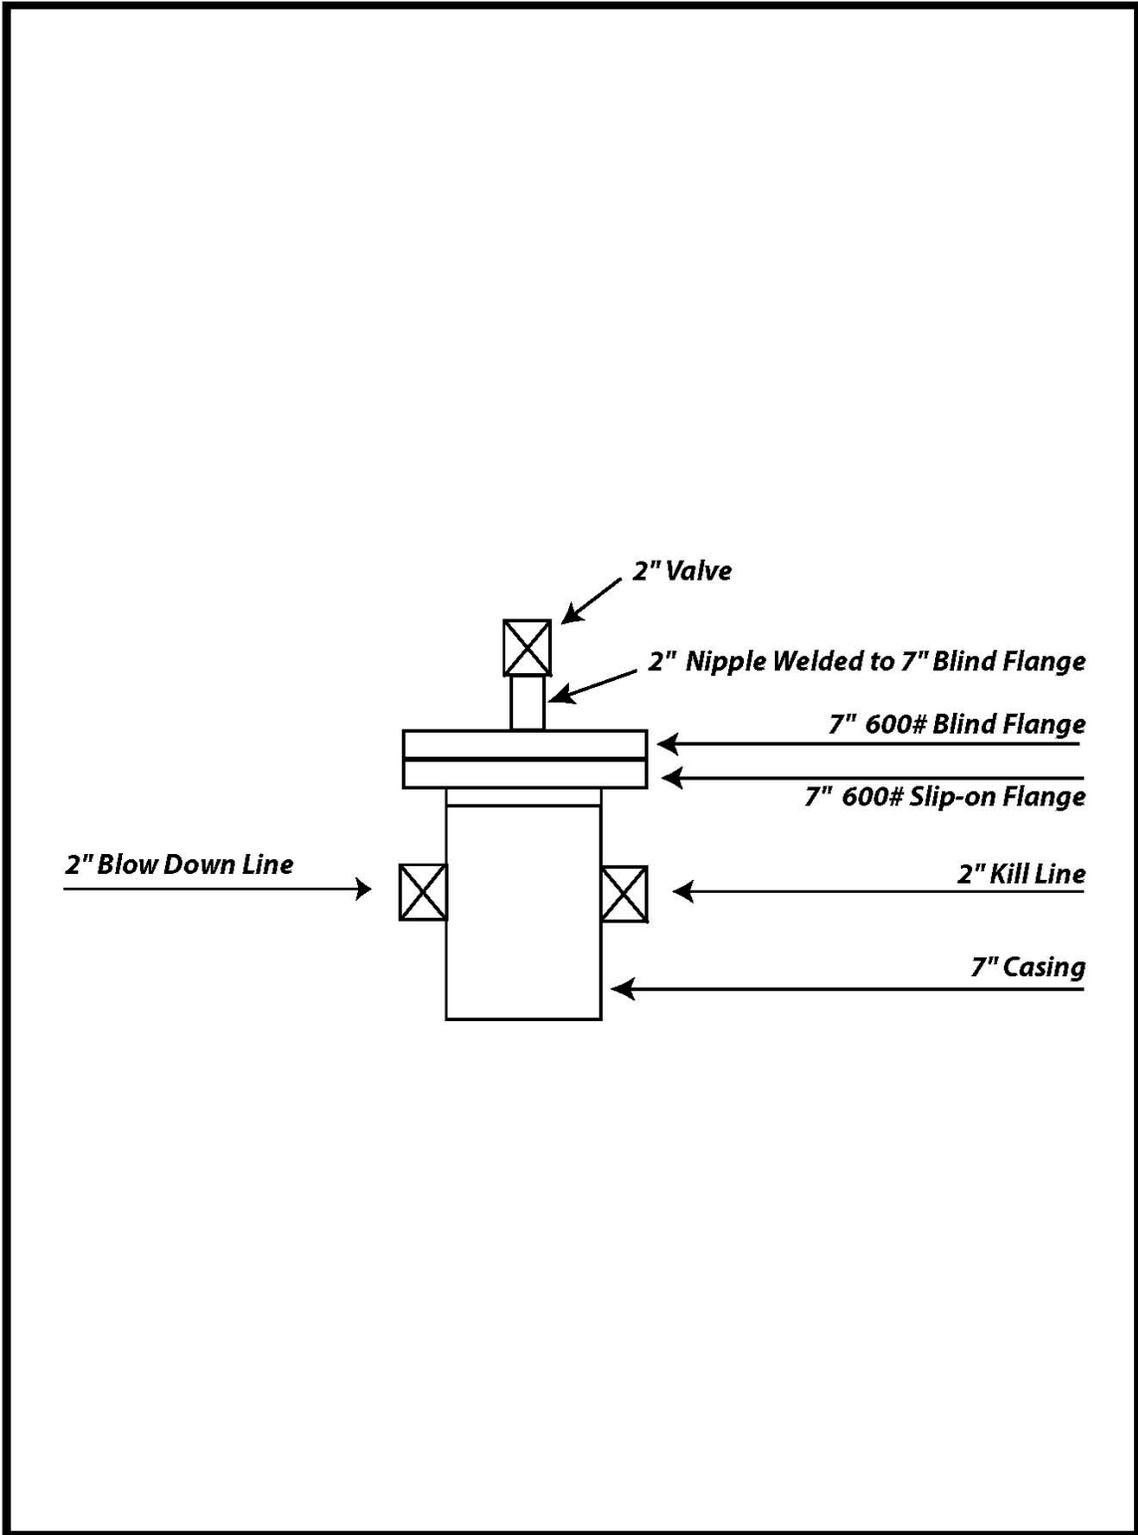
7" Wellhead Completion and Casing Test Equipment
